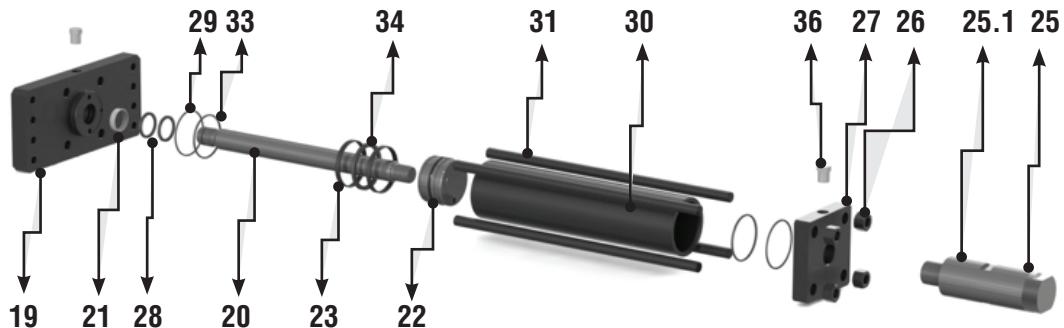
Exploded View of Hydraulic Cylinder – threaded piston version
